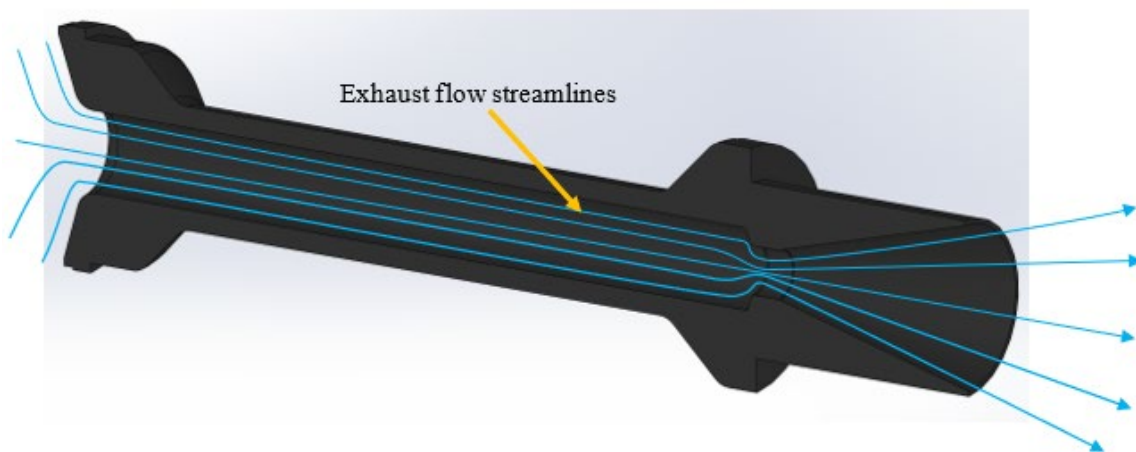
3D model cutaway of blast tube based on the O8000 motor
